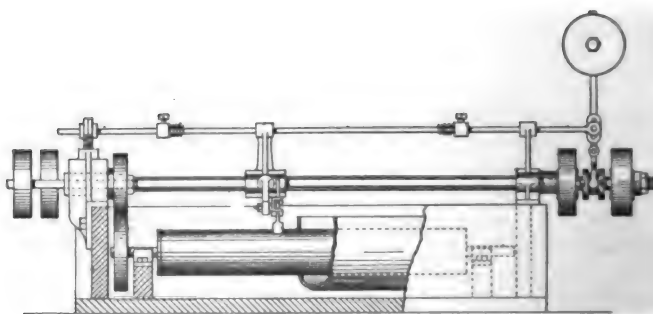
THE ELMORE COPPER DEPOSITING PROCESS.
